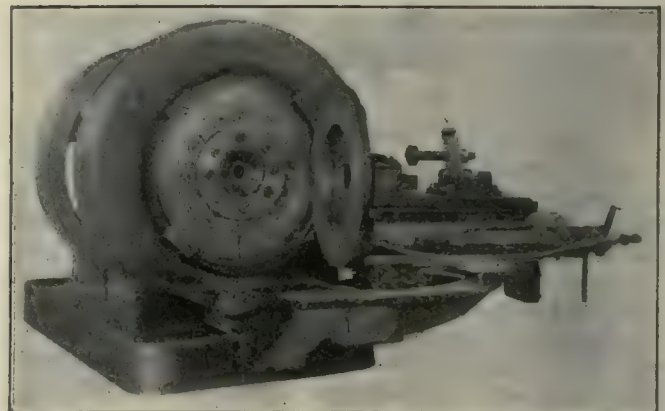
SADDLE HEAD SWUNG ON ITS HINGES TO SHOW ARRANGEMENT OF DIES AND ROLLERS
